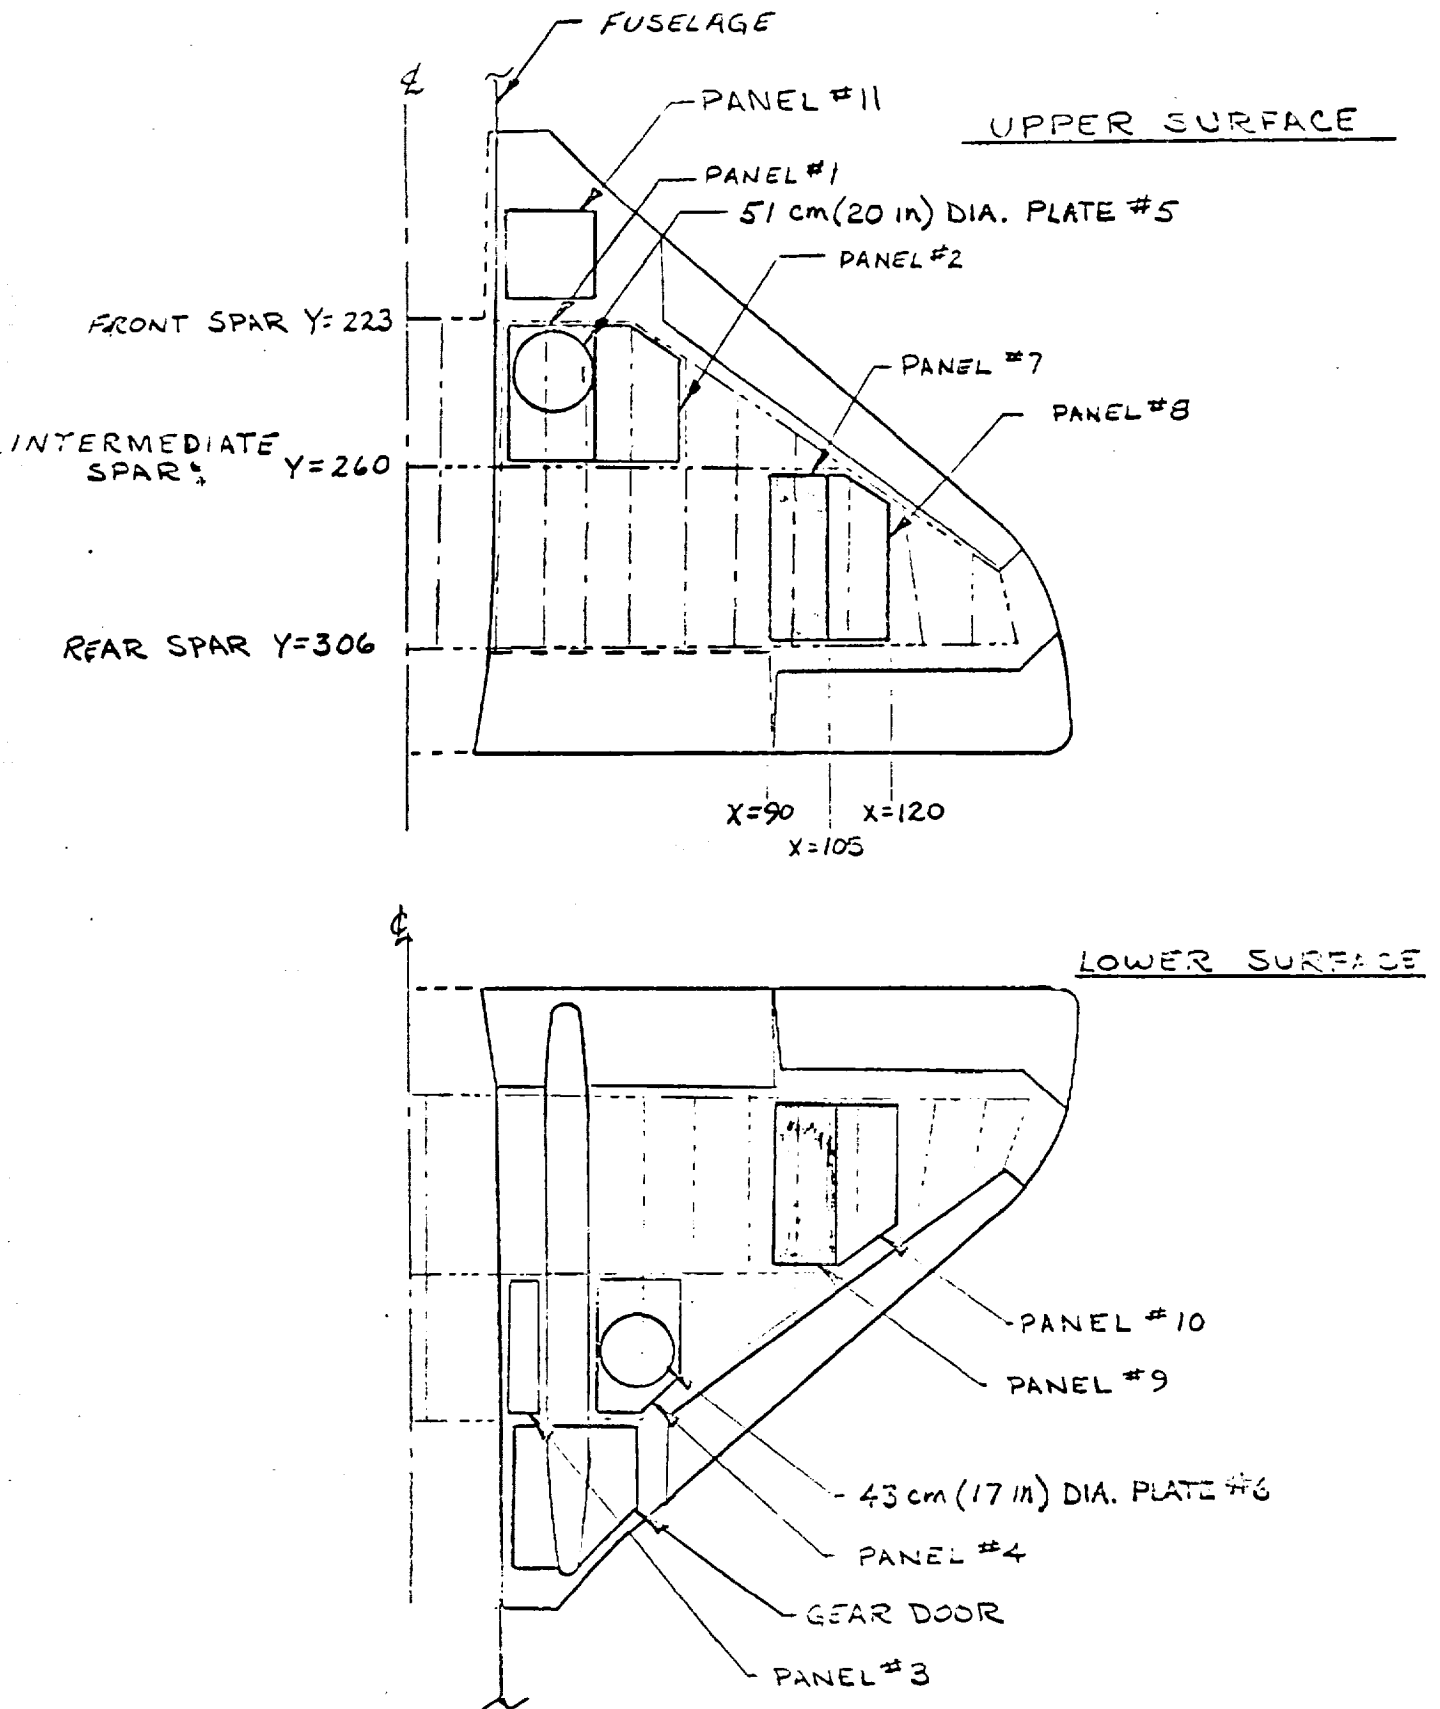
HOLE CONFIGURATION #7. PANELS 7&9 REMOVED
